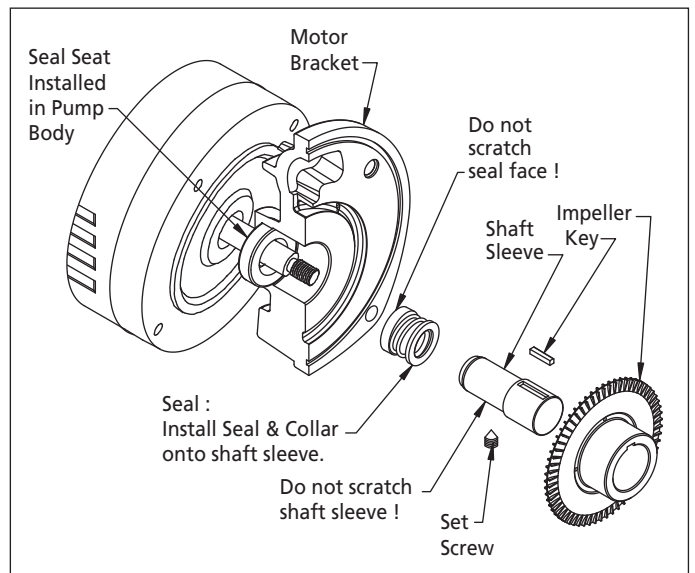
Seal, Collar, Sleeve and Impeller Installation
